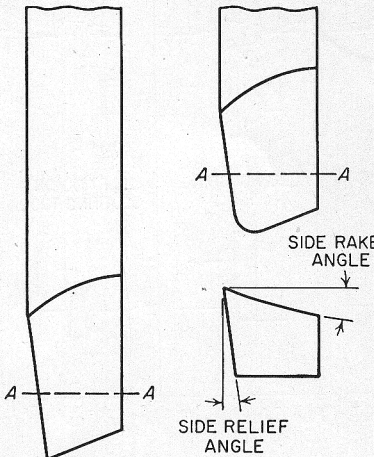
Rake angle and side relief angle on shaper tools. A-A are cross sections of the tools.
